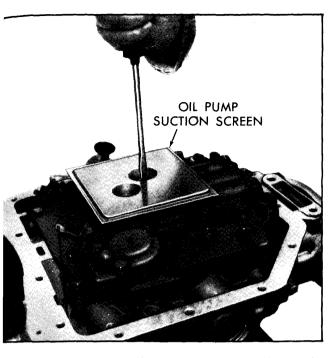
Removing Oil Pump Suction Screen (Strainer) from Valve Body
